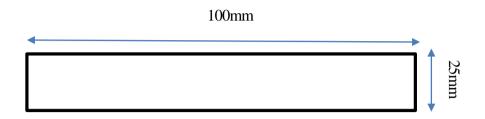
The dimension of tensile testing machine (ASTM D3039)
